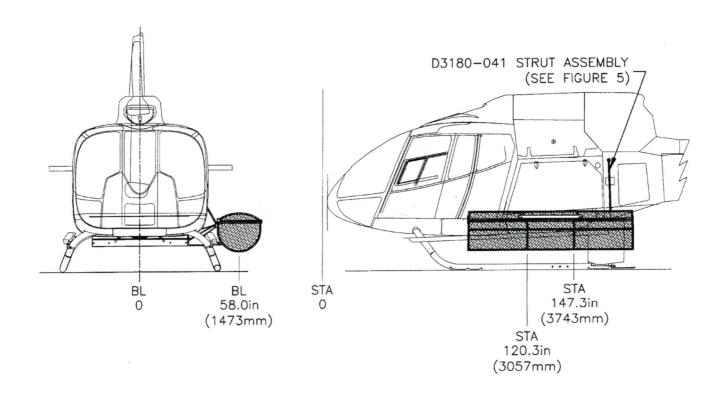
D130-701-041 Heli-Utility-Basket™ Installation (LH Installation Shown, RH Opposite)
